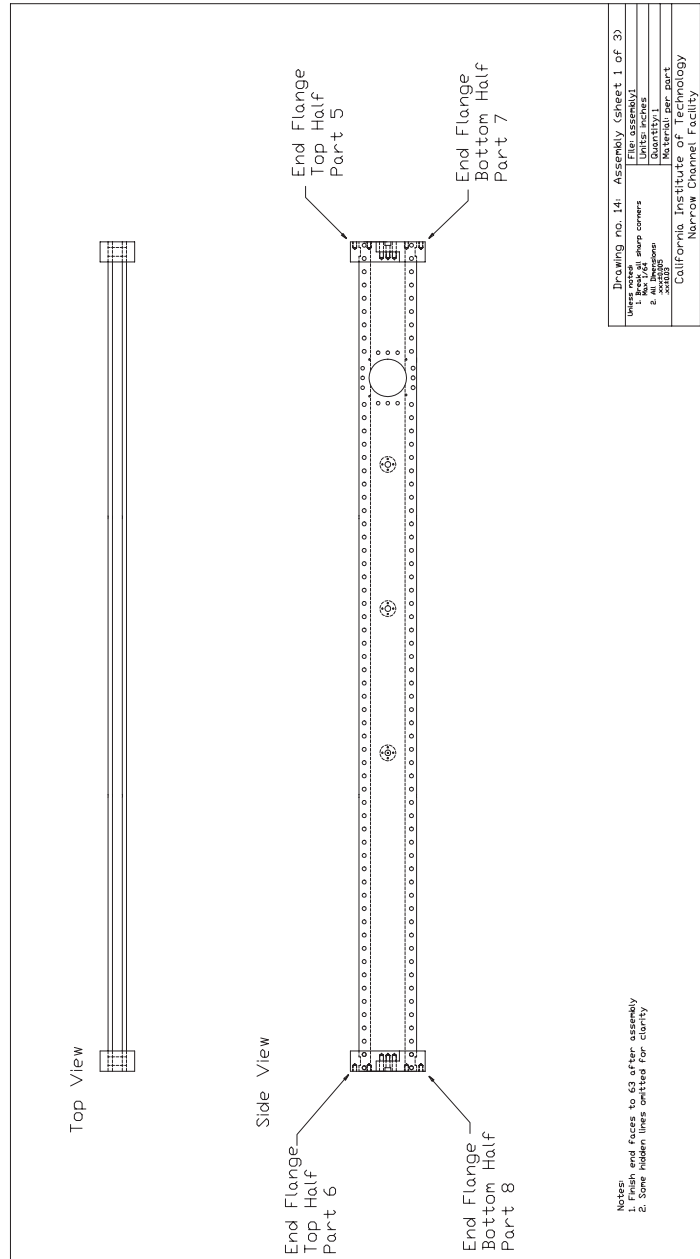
Assembly (sheet 1 of 3), Dwg No. 14
